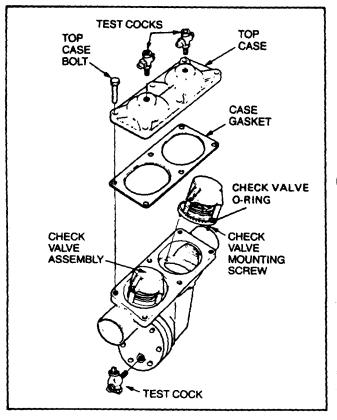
34" AND I" CHECK VALVE ASSEMBLIES
